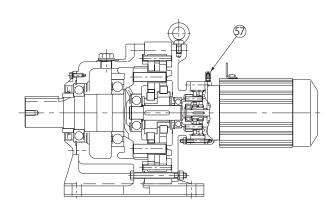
Type CHHM (Horizontal, Gearmotor), Double Reduction (Example: Frame size 6185DA)
